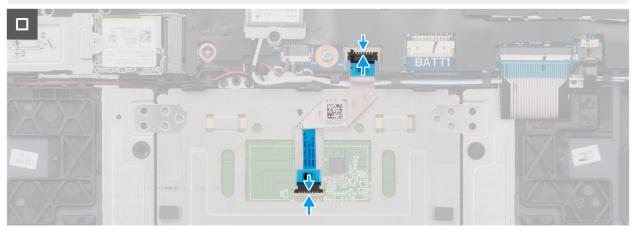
Installing the touchpad (for computers shipped with an aluminum chassis)
